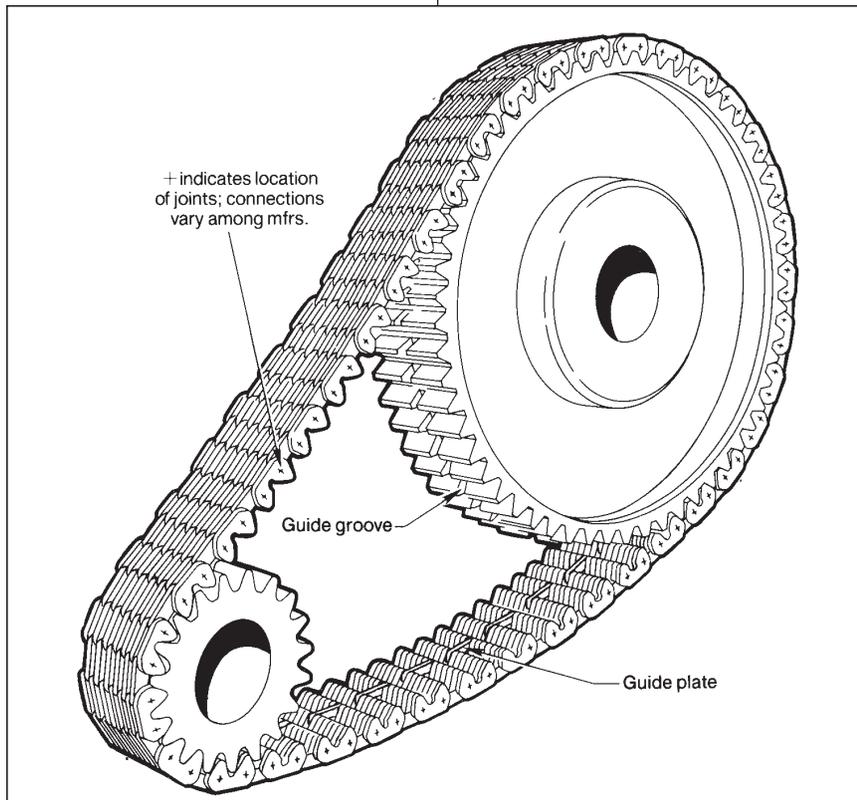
Inverted tooth (silent) chain drive. These sprockets are grooved for center guide chain.
